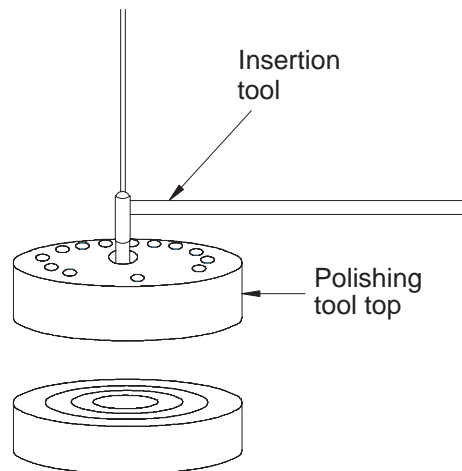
Inserting the Terminus into the Polishing Tool
